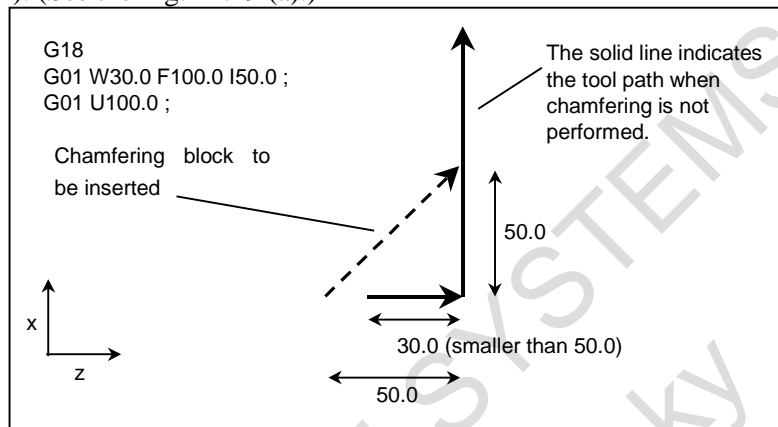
(a) Example of machining which causes alarm PS0055
